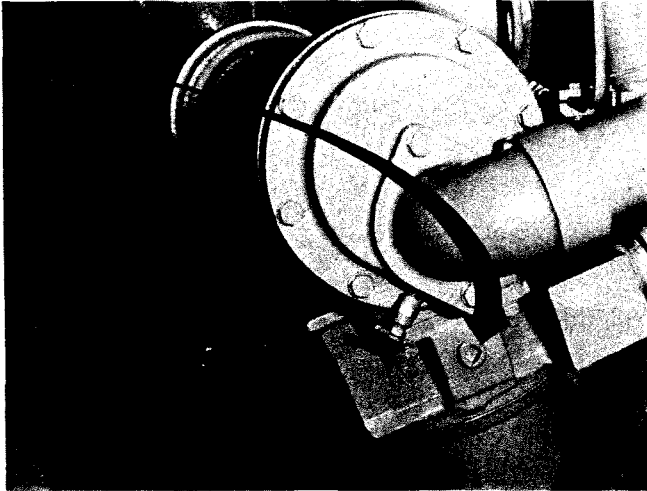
, (V41816). Lubricating system priming point — V-1710 Engine
